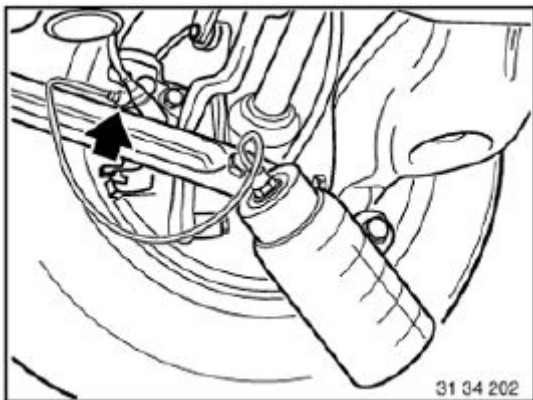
Locating Bleeder Hose With Collecting Tray To Bleeder Valve On Rear Right Brake Caliper
